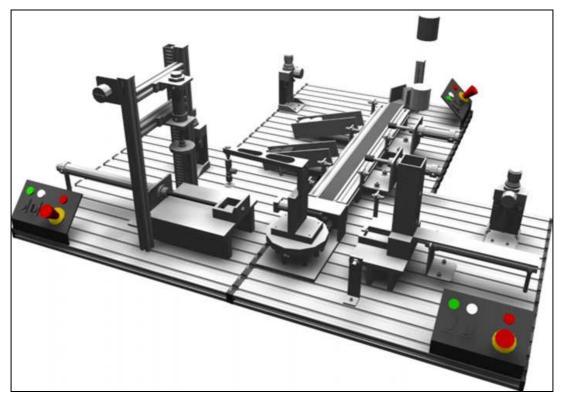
Bench scale equipment: Stamping and sorting machine from Department of Embedded System
